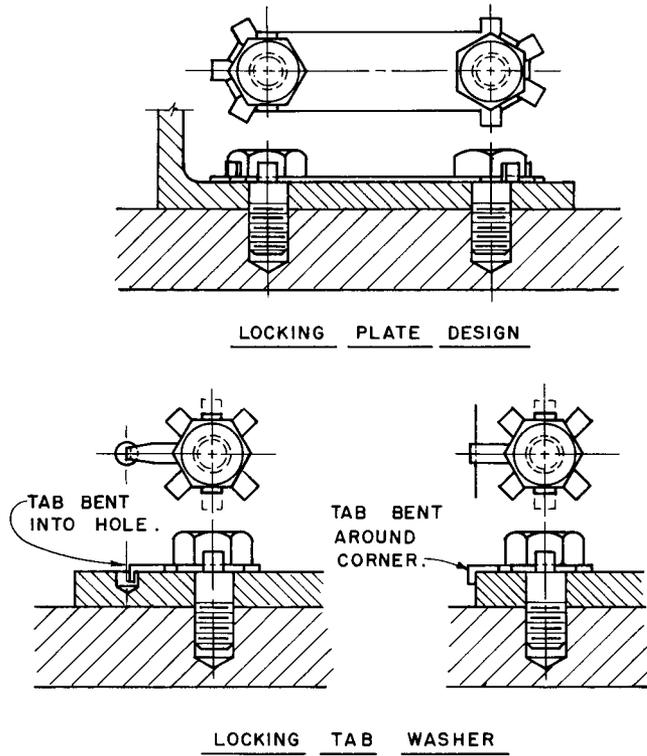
Class-B Locking Plate and Locking Tab Washer Designs.
